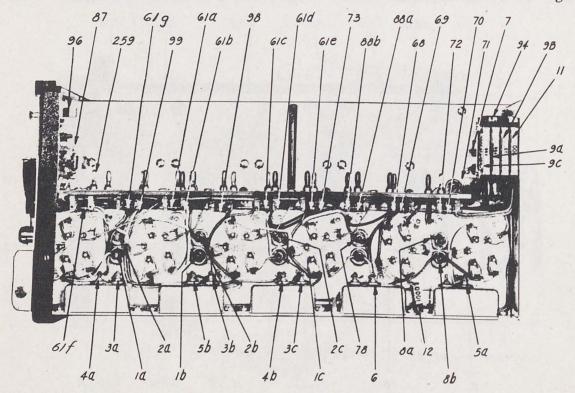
Radio Receiver BC-AL-229, Bottom View With Case Removed
